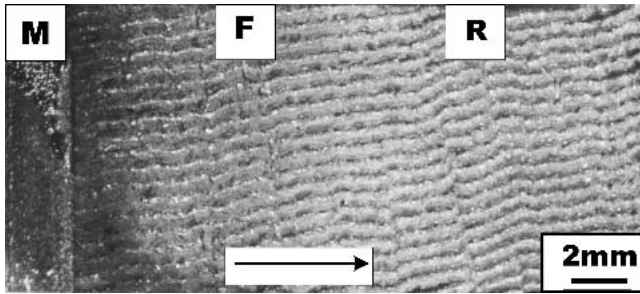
Fracture surface of fatigue test specimen: M indicates the spark eroded one, F indicates the fatigue crack propagation surface, and R indicates the surface left by final rupture
